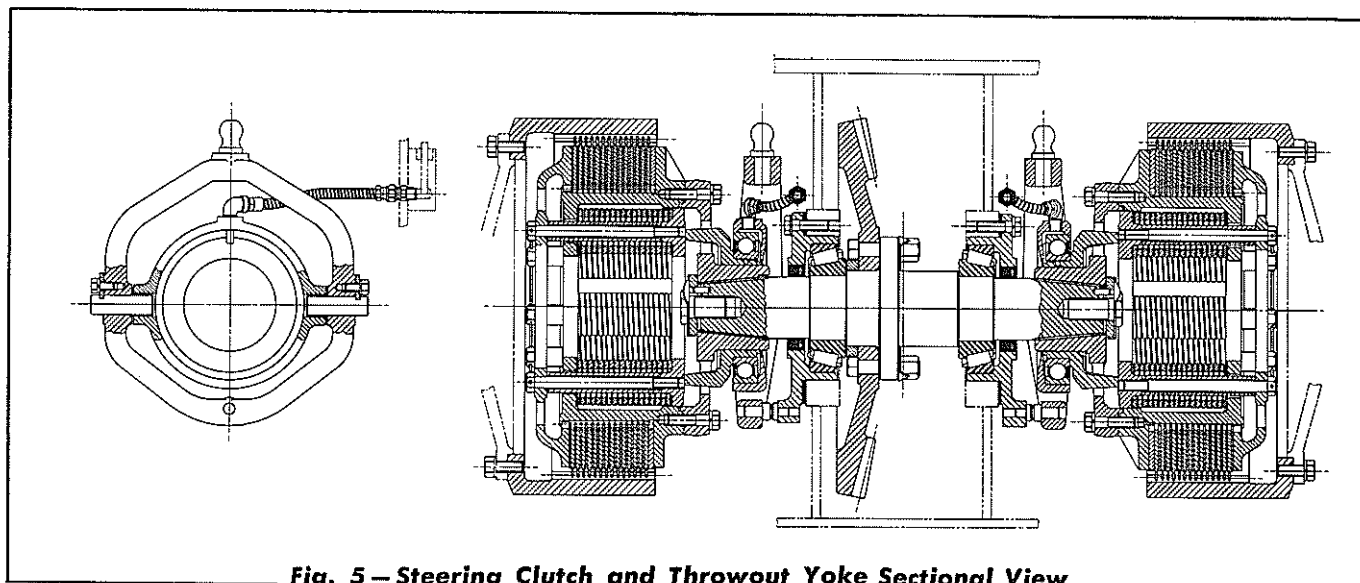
Steering Clutch and Throwout Yoke Sectional View
